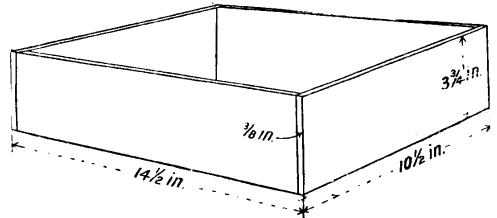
Three valves are mounted on a raised ebonite platform or shelf, dimensions of which are given here
